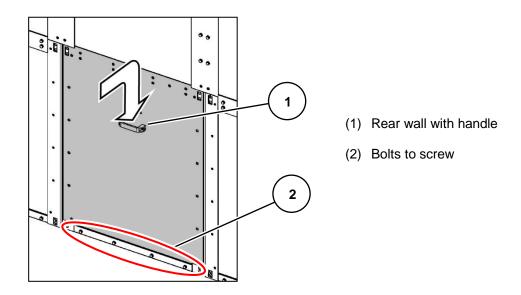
All panel versions except for contactor panels with panel width 435 mm and switchdisconnector panel: Installing and fixing the rear wall
